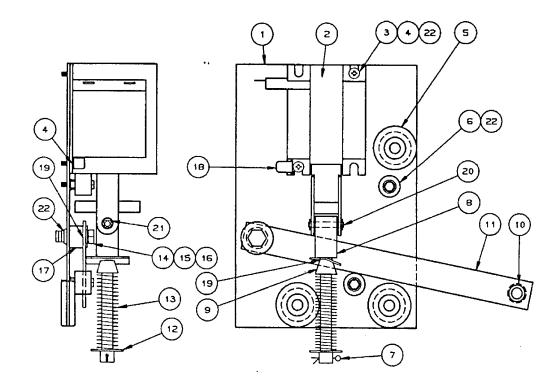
SOLENOID ASSEMBLY - EXPLODED VIEW & PARTS LIST
